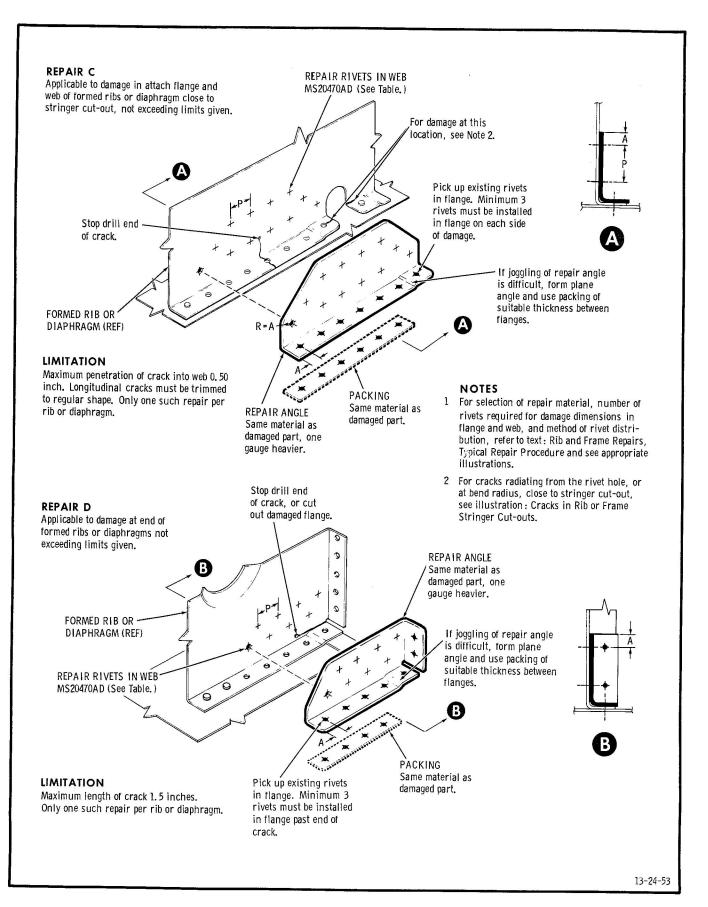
(Sheet 2 of 2) Rib or Frame Flange and Web - Repair
